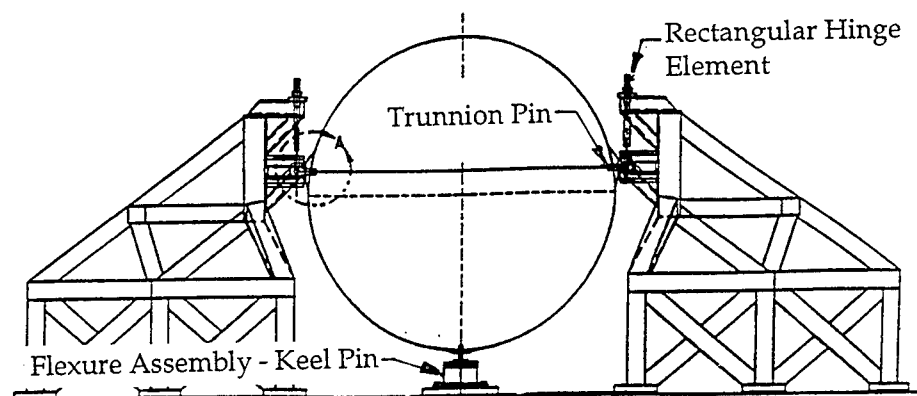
X-Direction View of Cross-Section of Universal Test Fixture with Redesigned Interfaces
